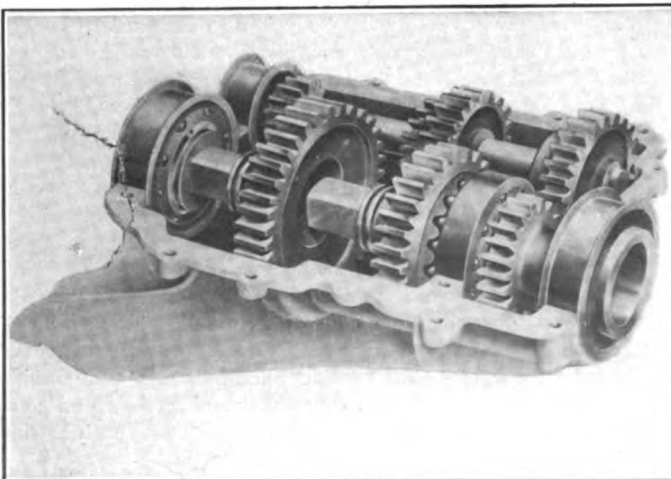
Transmission gear of the Mark 85 car, showing short shafts, Hess-Bright ball bearings, and using fine materials
